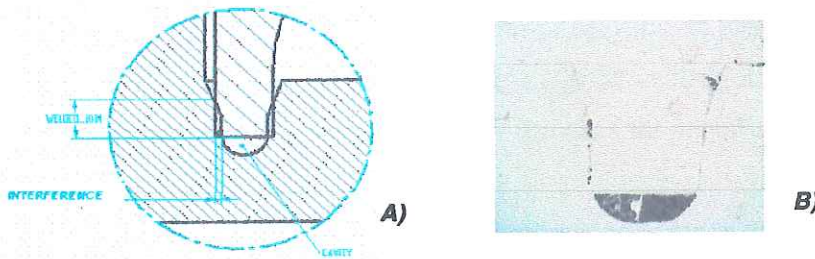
Annular Deformation Resistance Welding (ADRW) cross section view A) Detailed drawing interference and B) Prototype part
